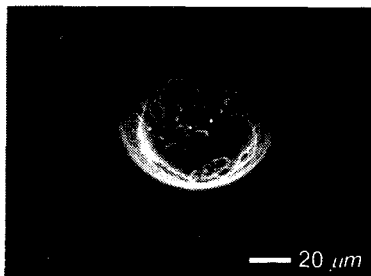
Blind hole surface covered with Cr oxide layer after machining without balance electrode
